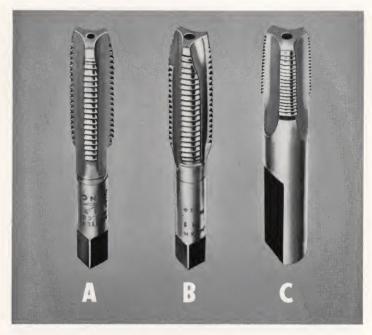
(A) Standard tap; (B) Spiral-pointed screw thread tap; and (C) Pipe thread tap. (All with deep flutes.)
